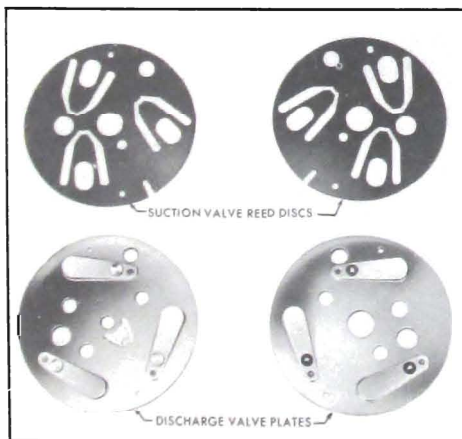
Suction Valve Reed Discs and Discharge Valve Plates
